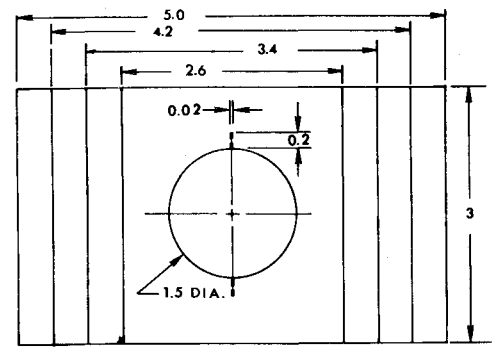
Composite overlays used to reinforce cutout and cutout-with-crack specimens. Dimensions are in inches (1 in. = 2.54 cm).
